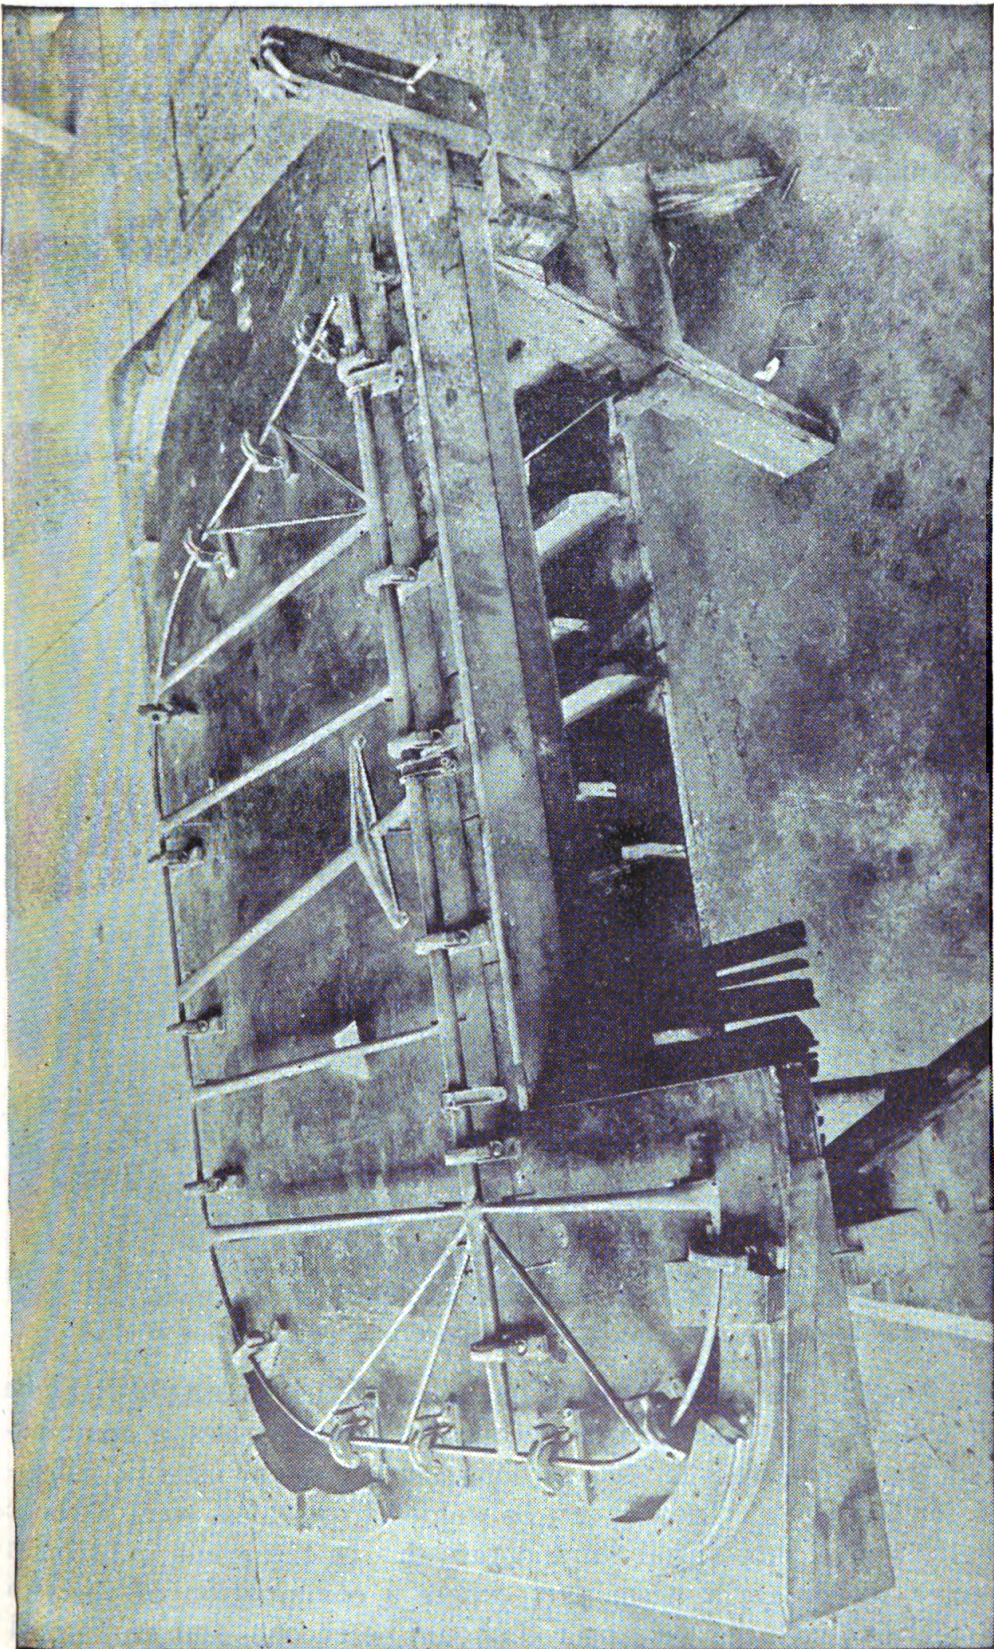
Welding jig for constructing flat tubular assemblies.
